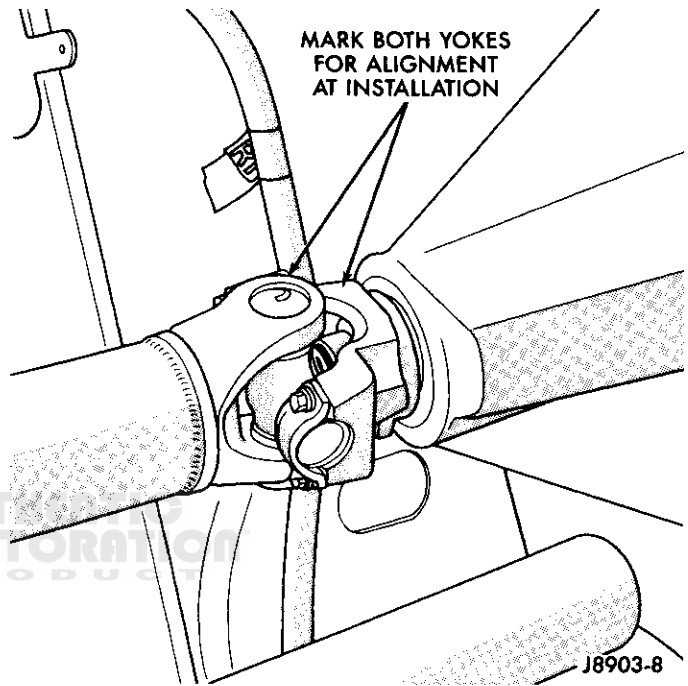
Drive Shaft & Drive Pinion Gear Shaft Yokes
